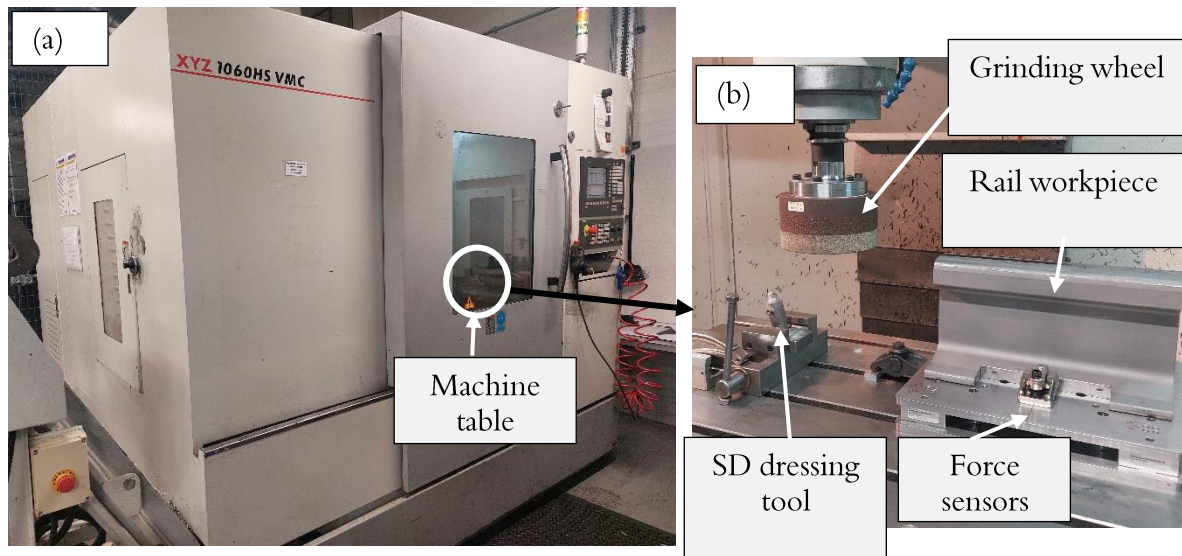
XYZ 1060 HS Vertical Machine Centre – (a) Façade of the machine, (b) Internal view of the machine bed and basic set up of the dresser, grinding wheel, rail workpiece and force sensors.
